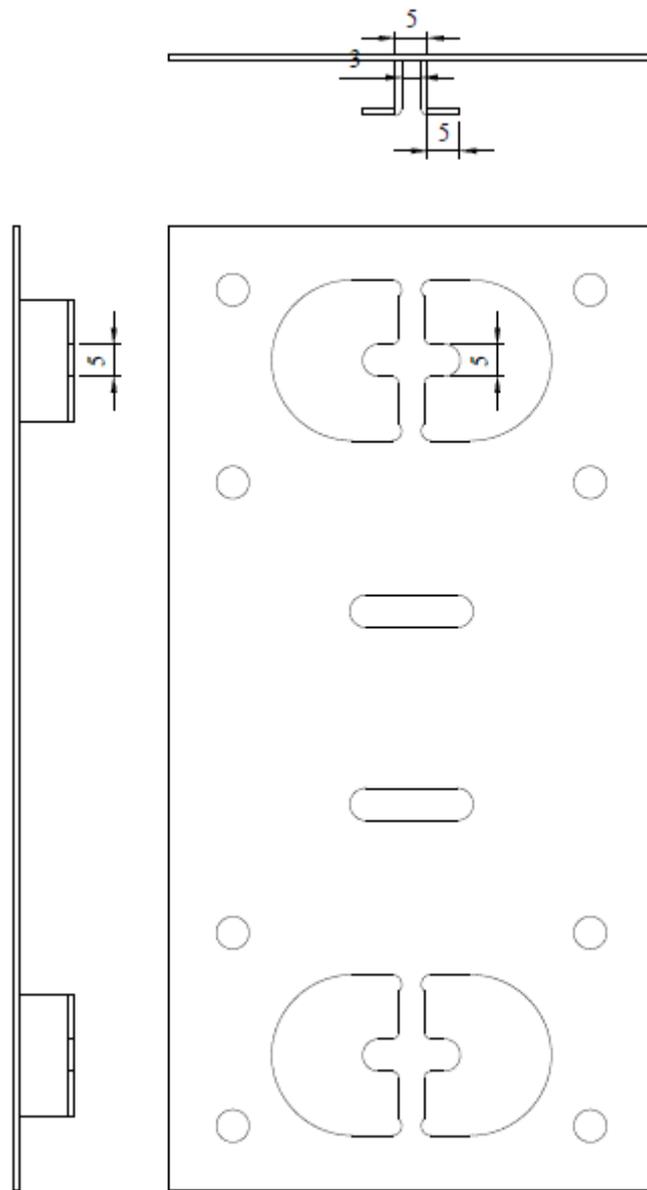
Technical drawing of the skin element fixing CRM.04-O
